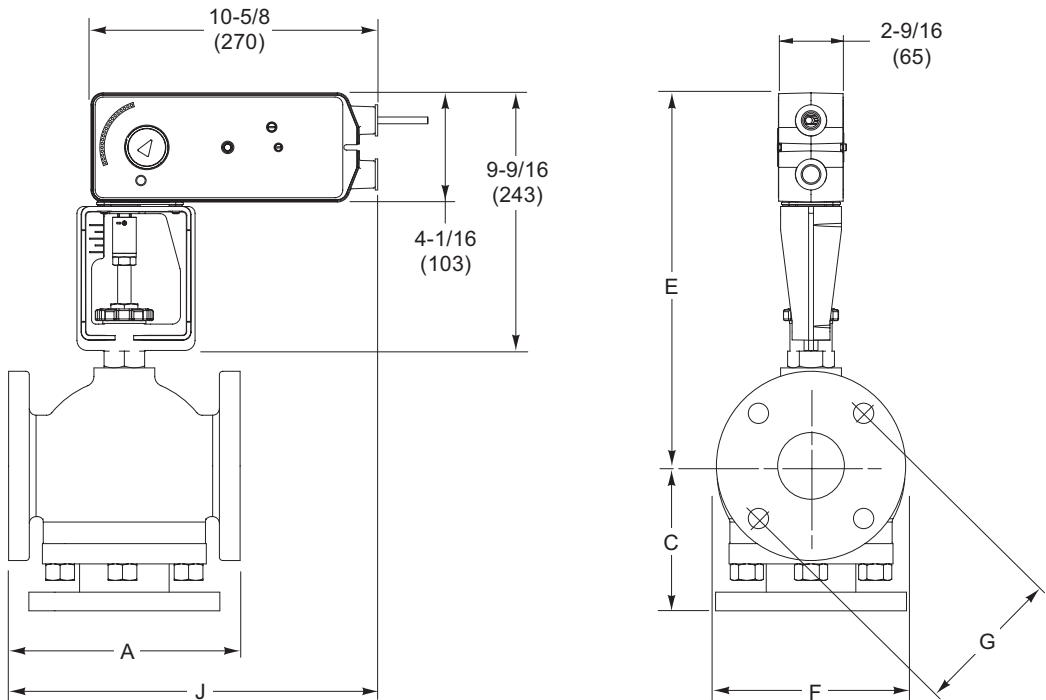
Mx61-720x with 2-1/2" to 4" 3-Way Flanged Globe Valve.
